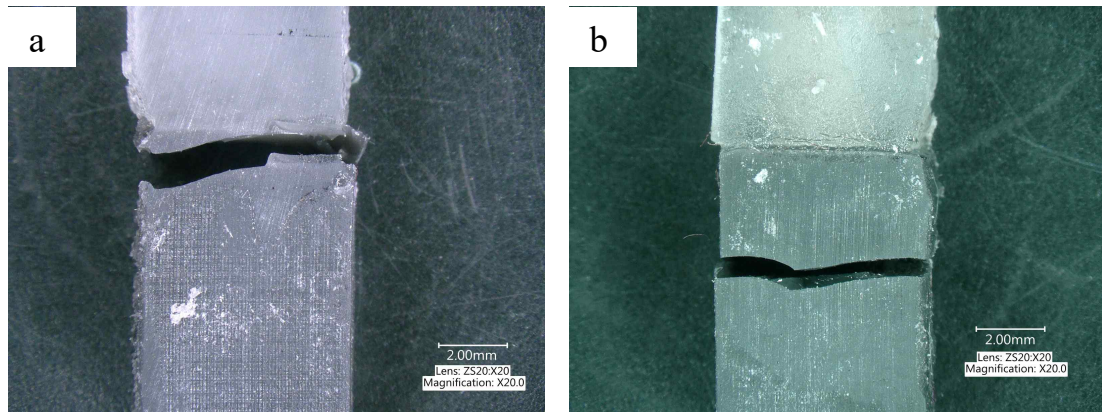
Tensile fractured polymer-welded samples (a) clear-flexible and (b) high temperature-flexible.
